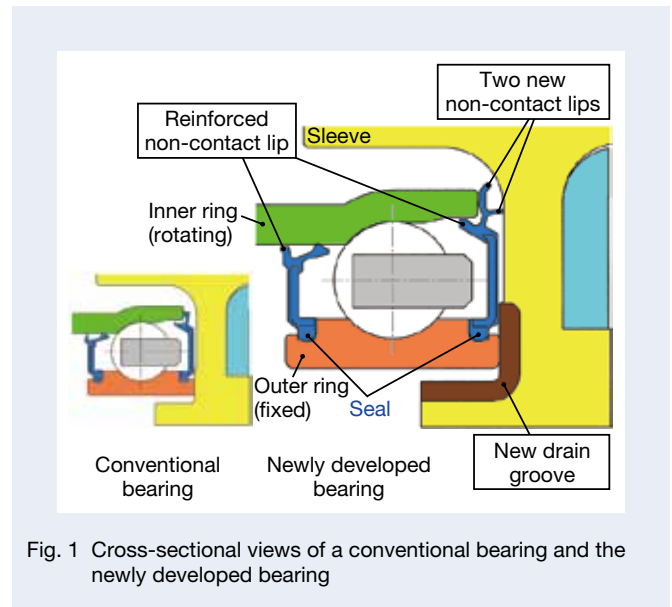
Cross-sectional views of a conventional bearing and the newly developed bearing
